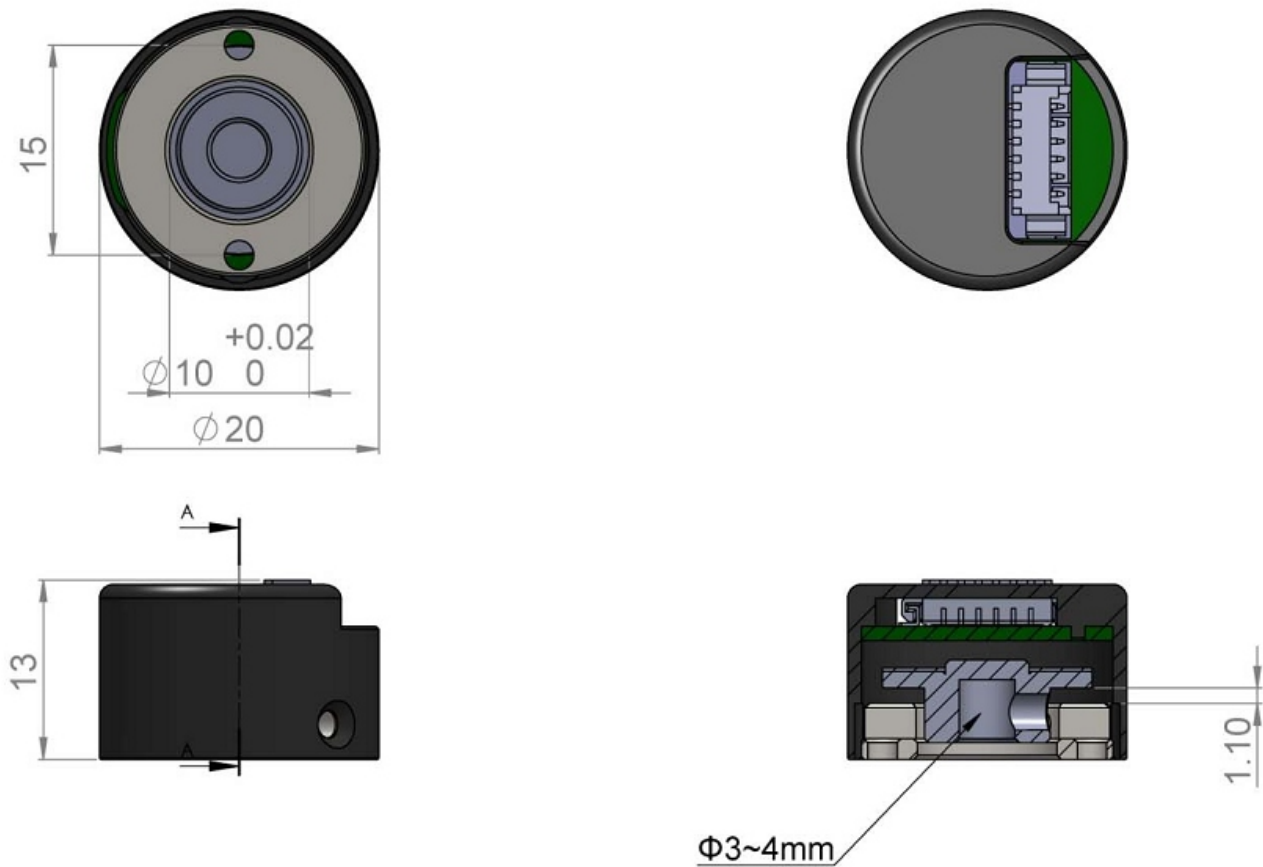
Bottom view, top view, side view, and cut view (units = mm)
